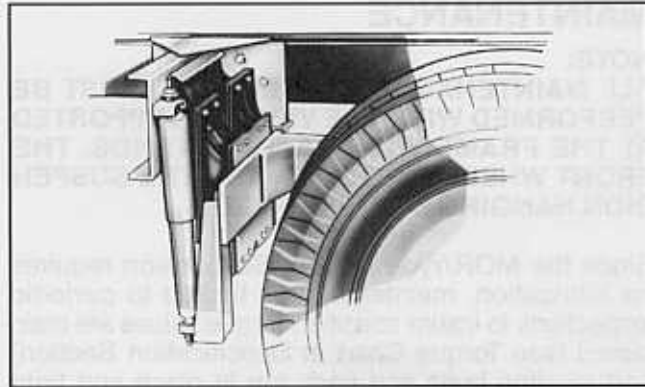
Rubber Spring Assembly and Hanger Assembly
